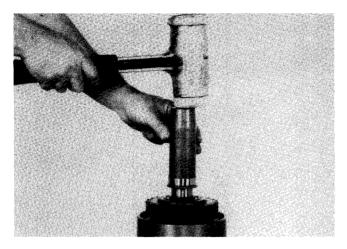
Install clutch shaft front bearing inner race with large diameter of race down.
